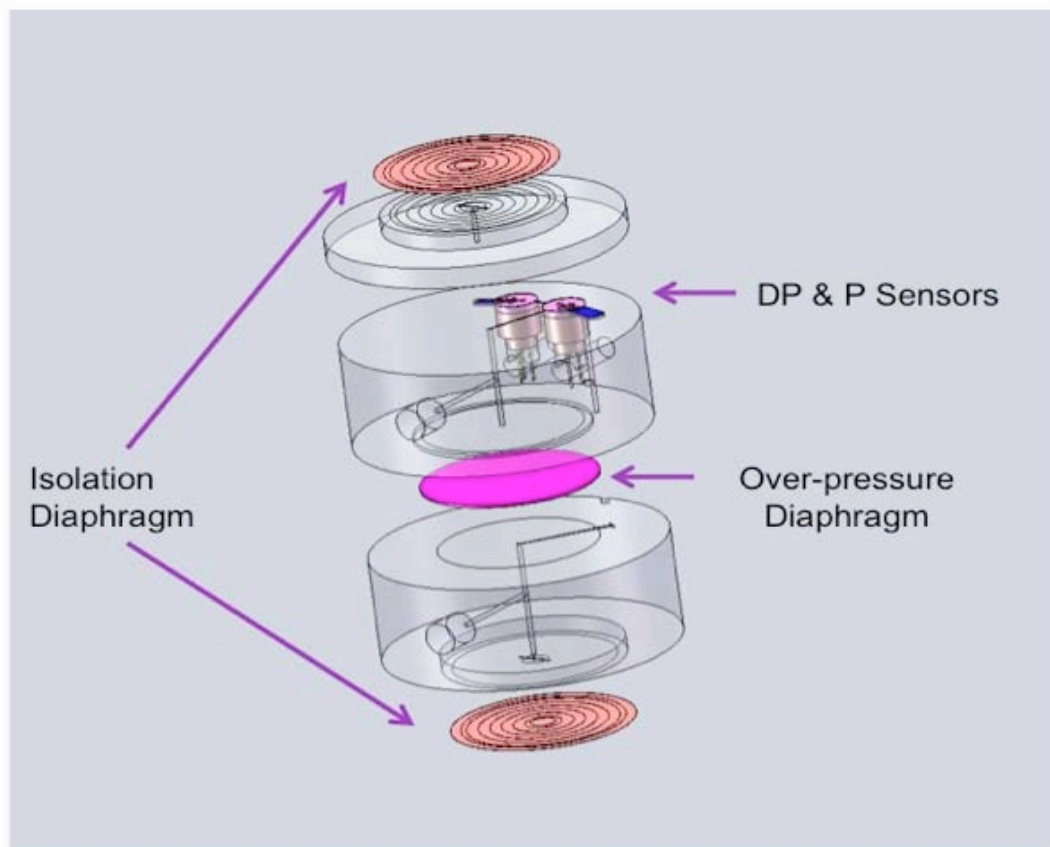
Exploded view of cell containing xHP/HT sensor chips.
